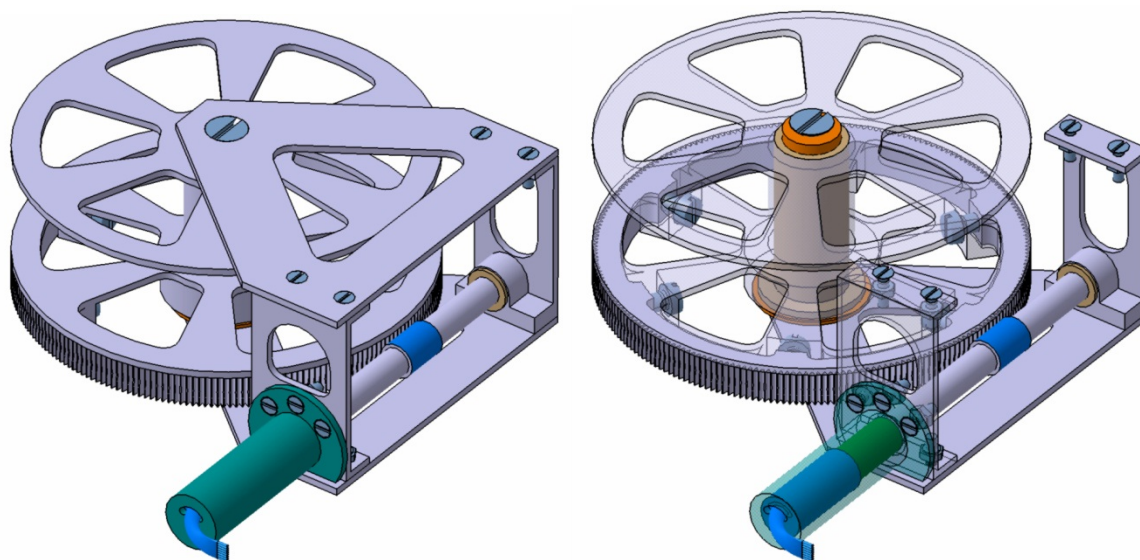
Assembled separate gear deployment mechanism, on the right side the parts which covered other parts transparent to show the position of the motor, the mounting of the reel gear wheel and the sliding bearings.
